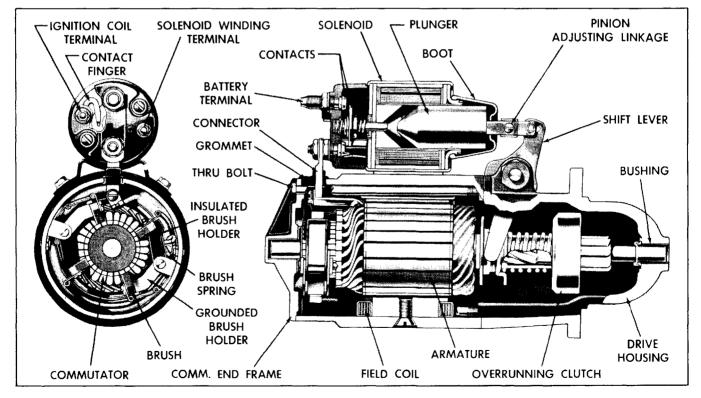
Starting Motor and Solenoid—Cross Section (Without Power Steering)
